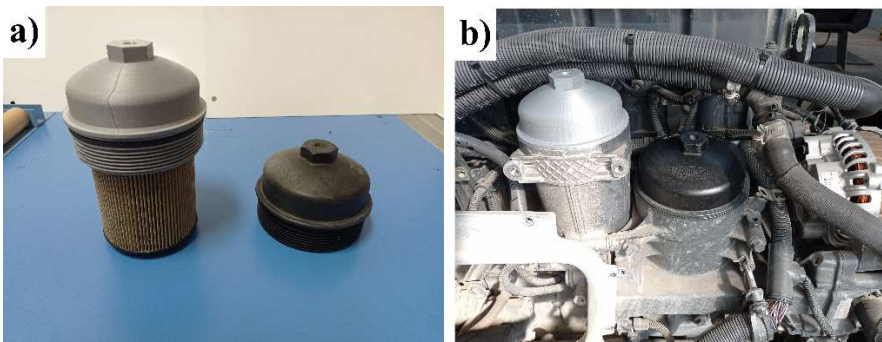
a) Comparison of the original part and the manufactured replacement part; b) the manufactured replacement part mounted on a medium tactical truck engine
